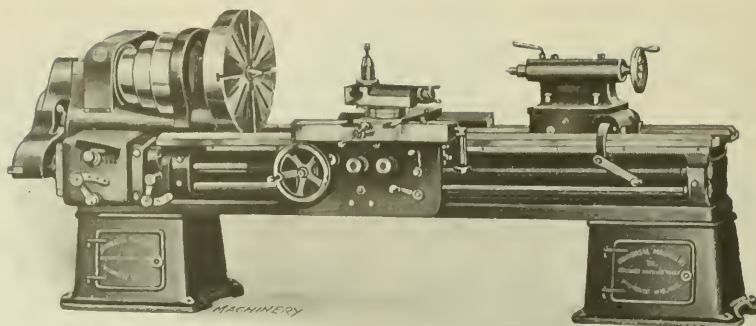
Universal Machinery Co.'s 24-inch Engine Lathe with Quick-change Gear
